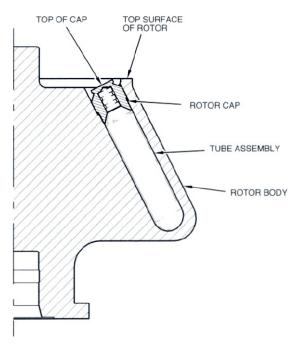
Properly Seated Rotor Cap in the T-8100 Rotor
